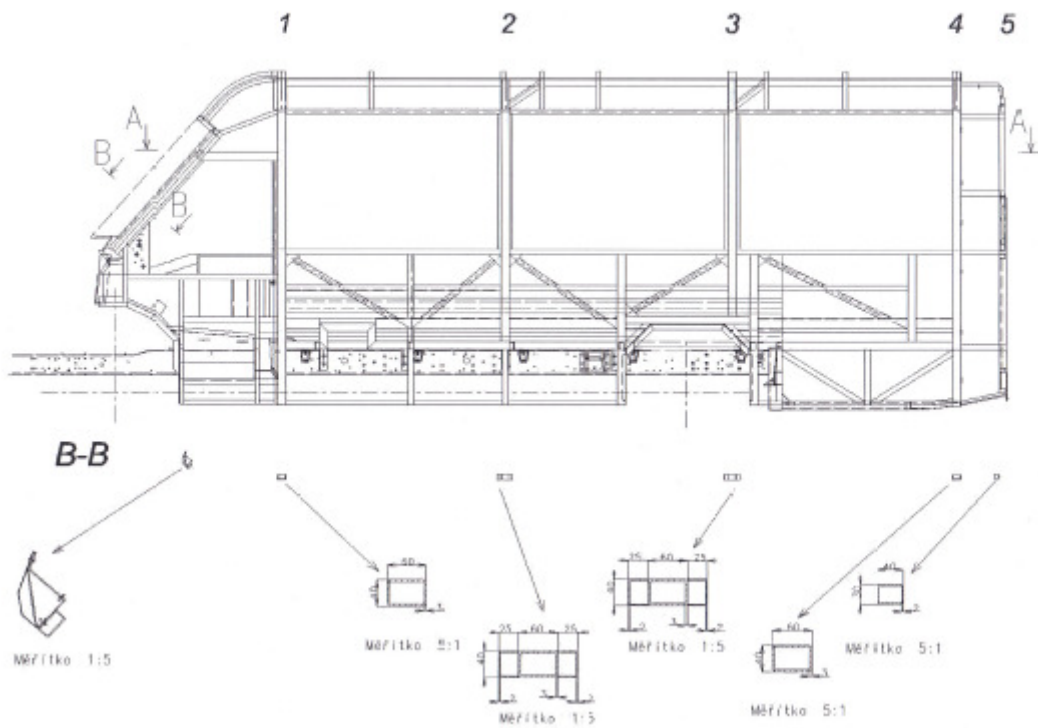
Structure of the right sidewall including door apertures in STRATOS LE37(L37)
